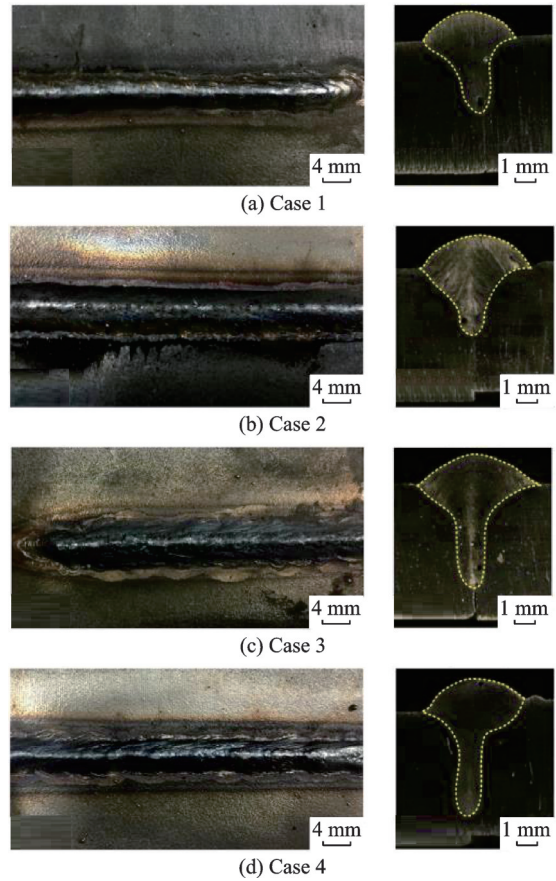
Surface profile and cross-section morphology of laser-MIG welded joints
